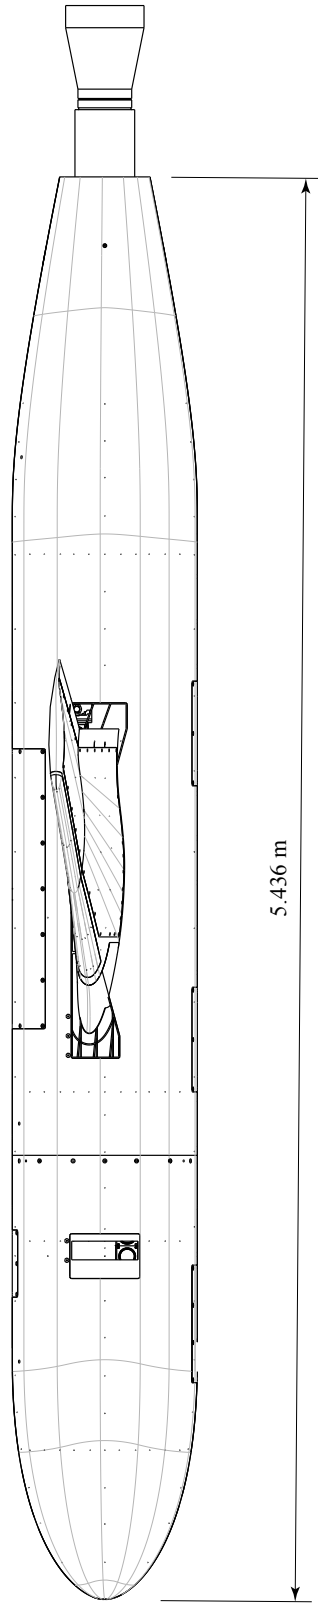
Port-side view of the wing-fuselage junction model assembly.
